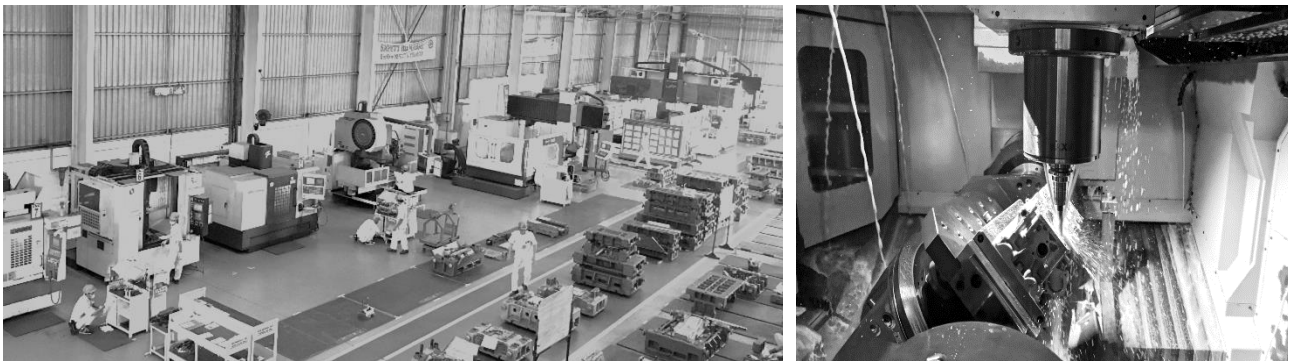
Typical industrial milling machine instrumented in this study. (left) Machine and facilities overview. (right) Close view of a typical milling chamber.
